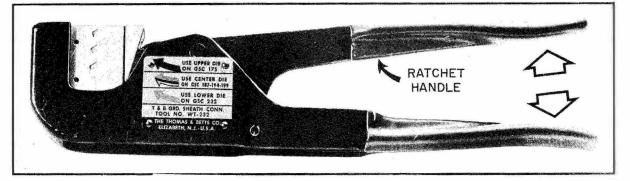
T&B Shure Stake Tool Multiple Hex Type.
